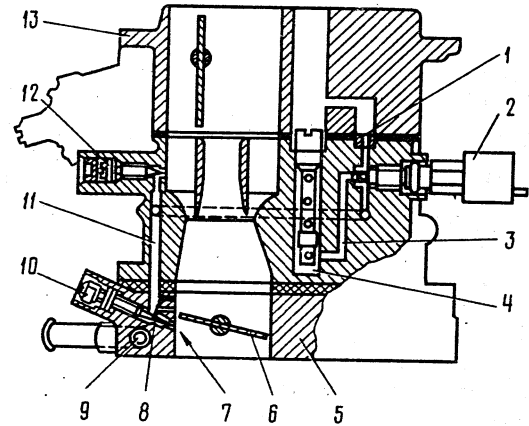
Idling System of Carburetor 2106-1107010:
